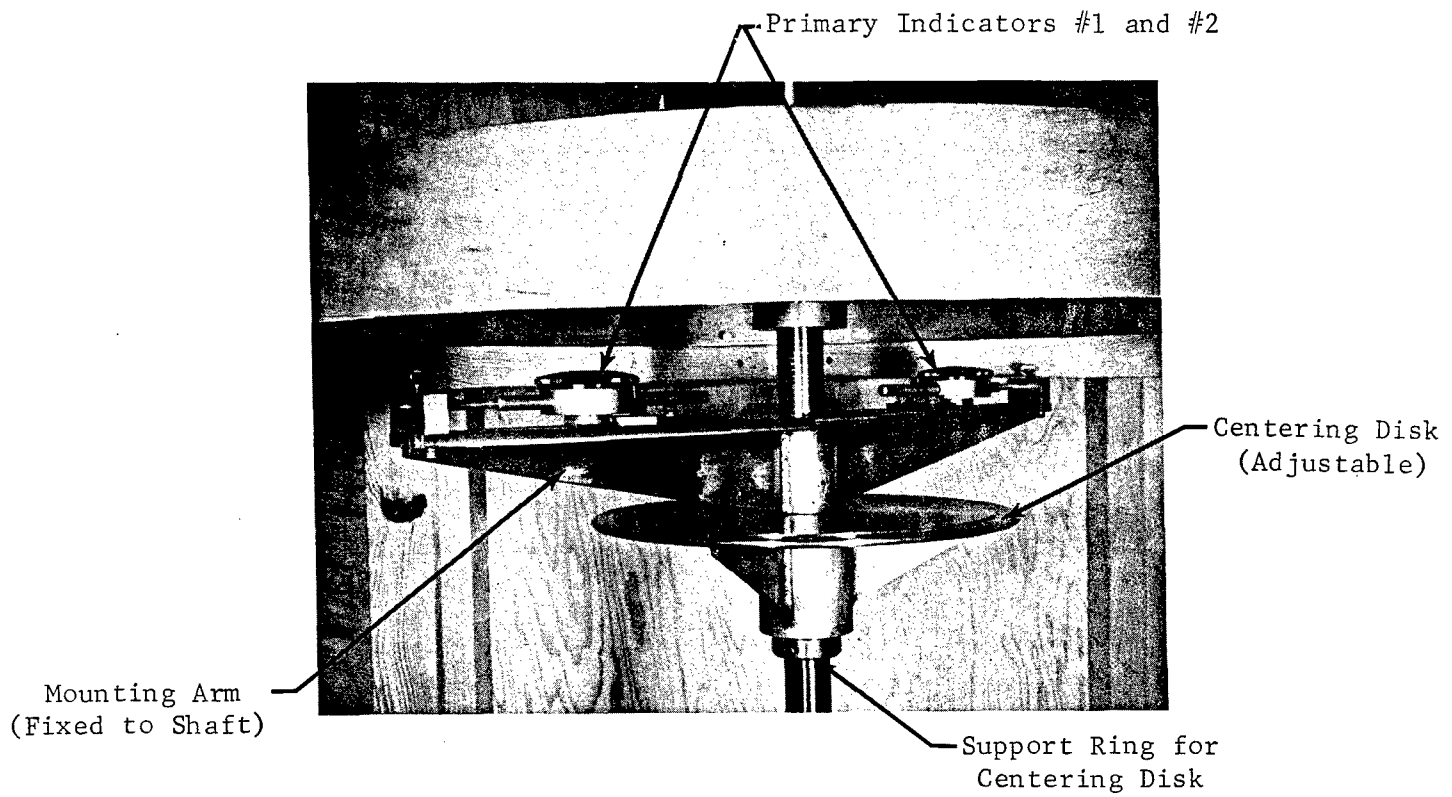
Check Gage, Mounting Ring and Movable Indicator Arm
